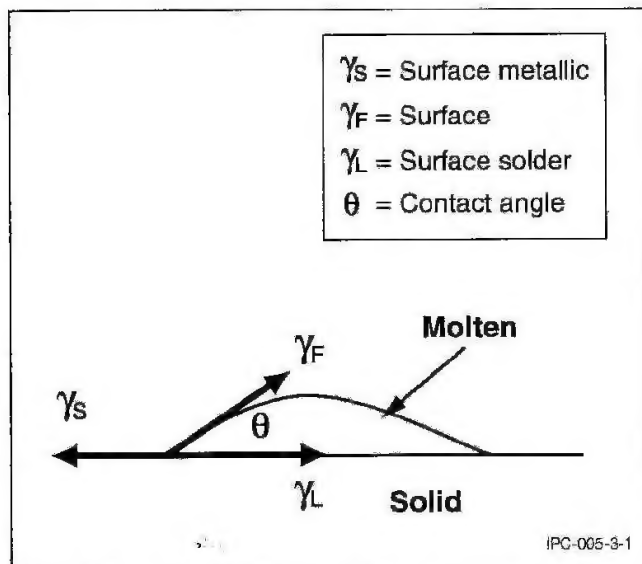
Surface Tension and Contact Angle of Molten Solder
